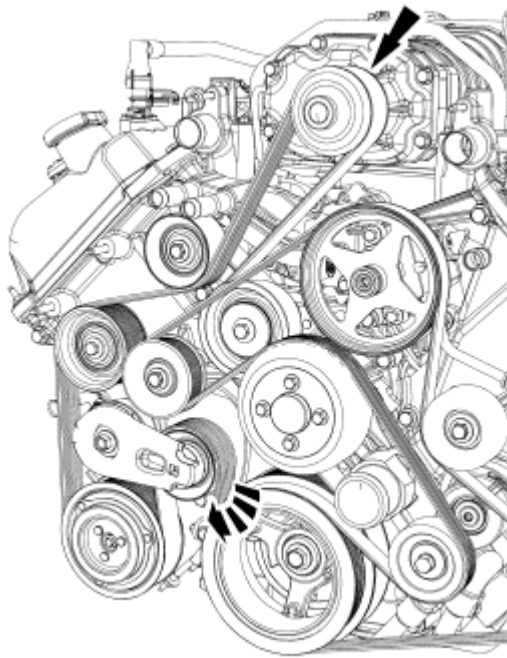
Rotating SC Belt Tensioner Clockwise & Remove SC Belt Off SC
